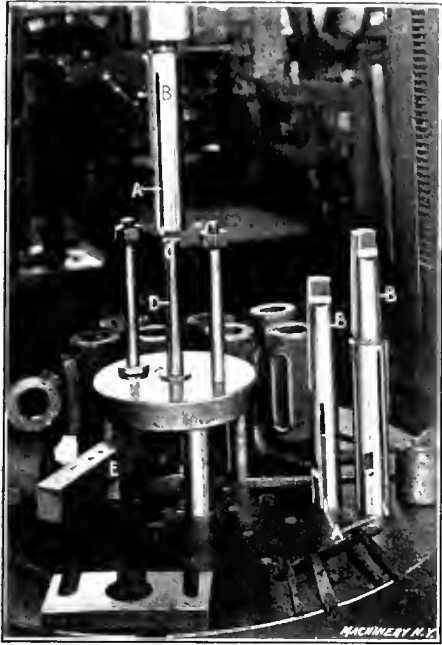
Fixture for Cutting Oil Grooves in Solid Journal Boxes
